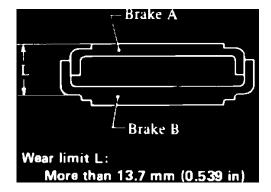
Typical brake set thickness measurement. Models w/automatic locking hub
